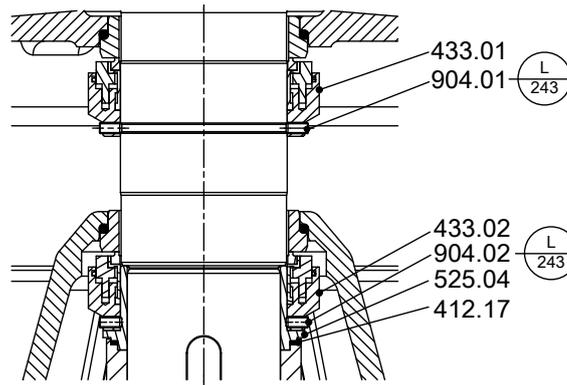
Mechanical seal with covered spring, standard for motors 260 8.N, 300 8.N, 350 8.N
